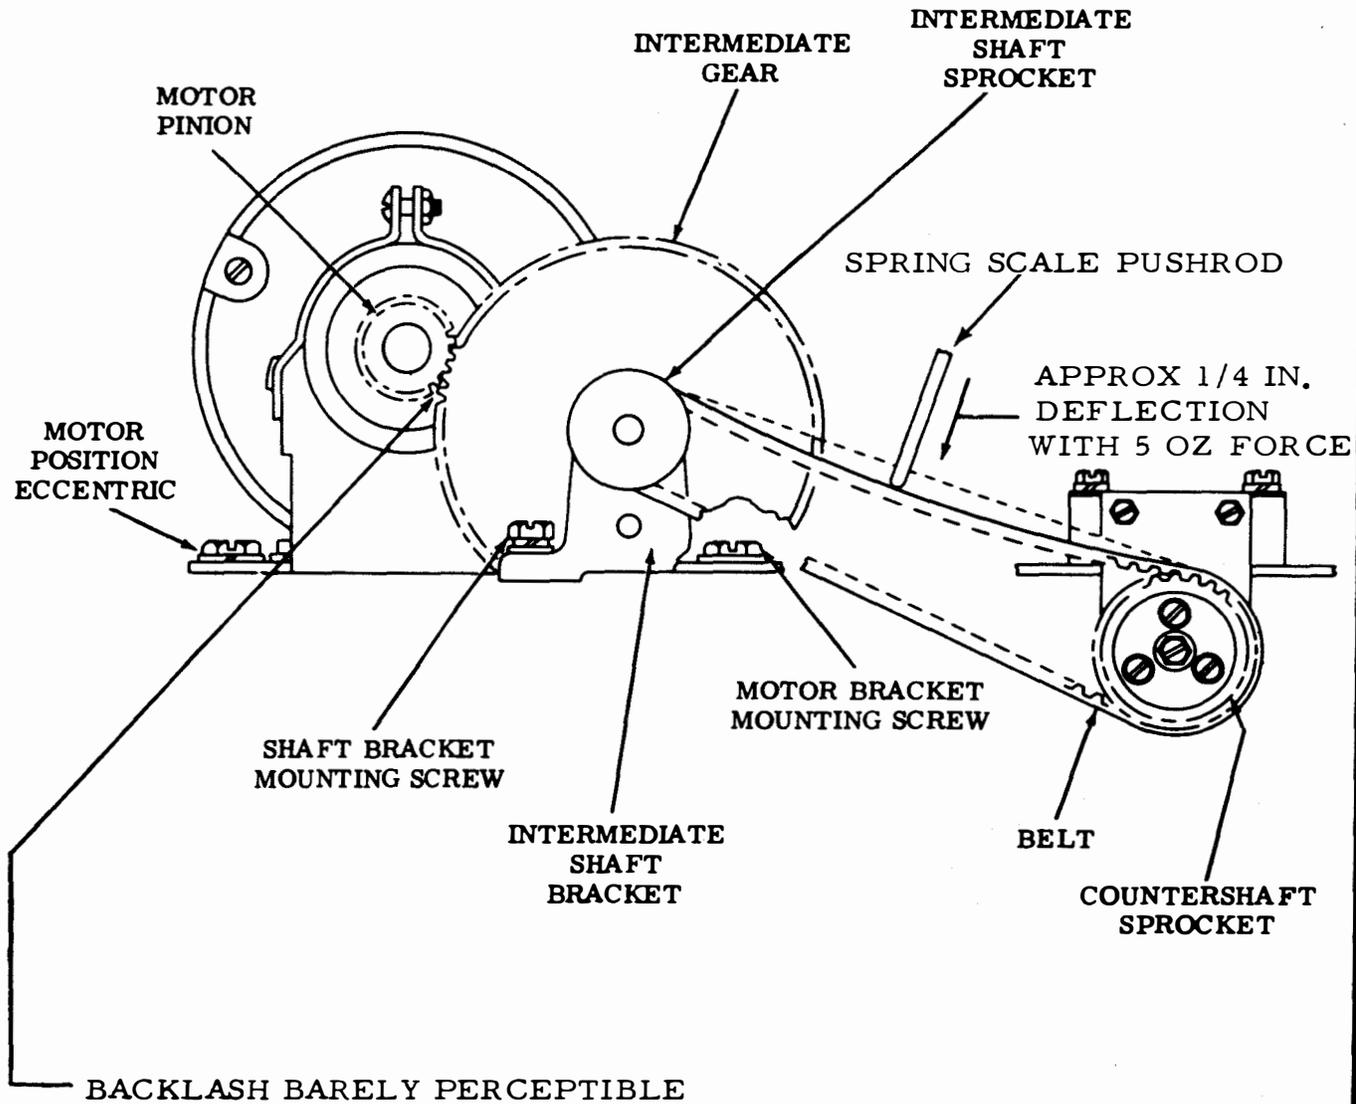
Belt Tension (Common Speed) and Motor Pinion - Intermediate Gear Backlash
